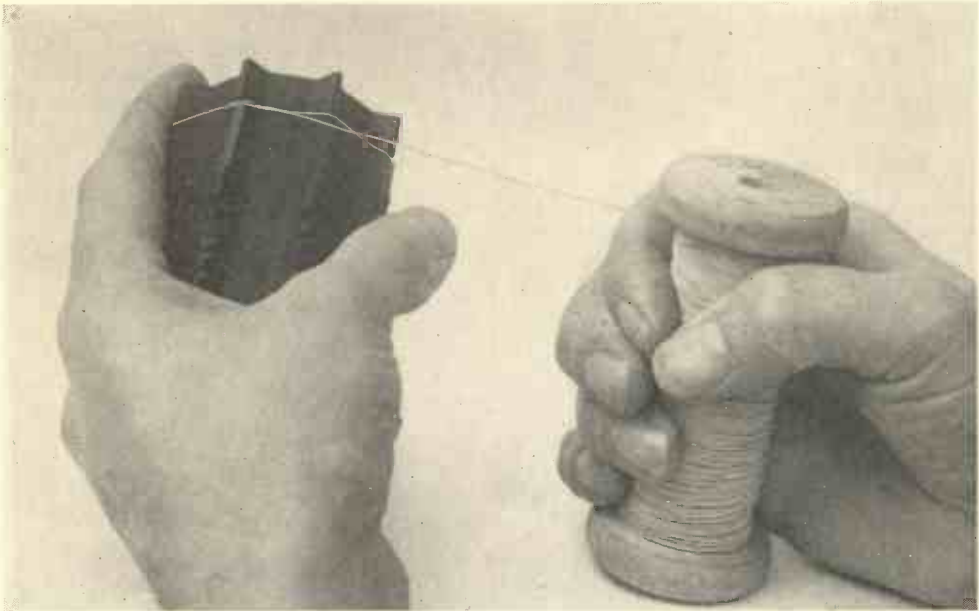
COMMENCING THE MEDIUM WAVE WINDING.
